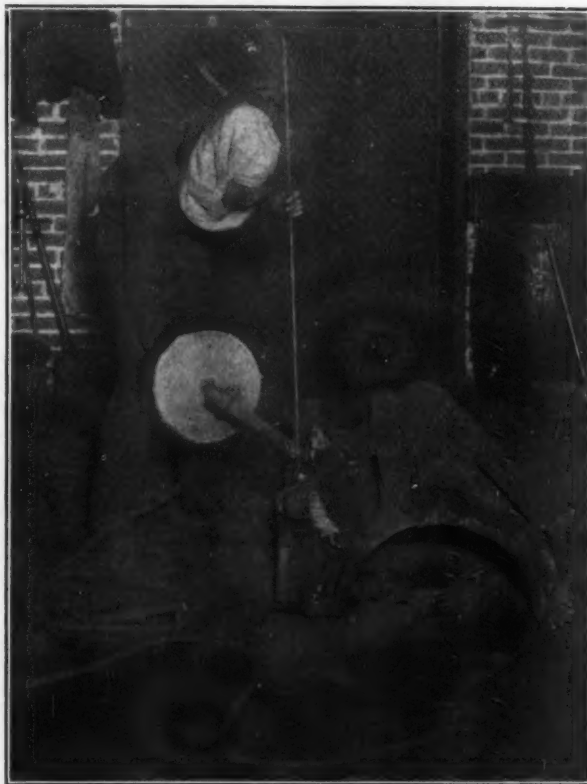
Using the Benardos or Arc Welding Apparatus.
